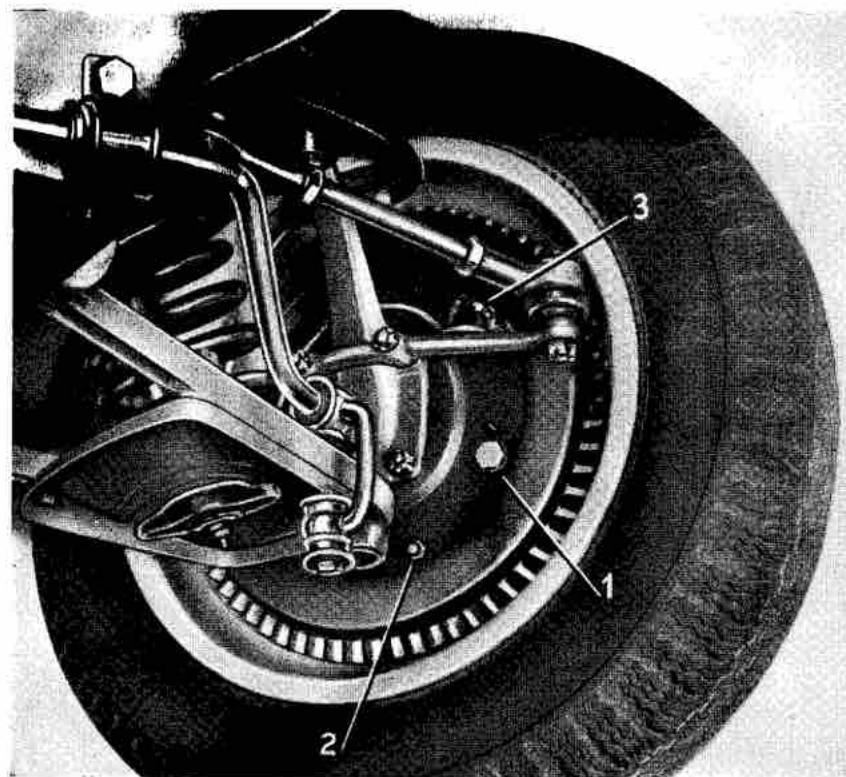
Adjustment of clearance between brake linings and drums; bleeding the front wheel hydraulic brake cylinders.
